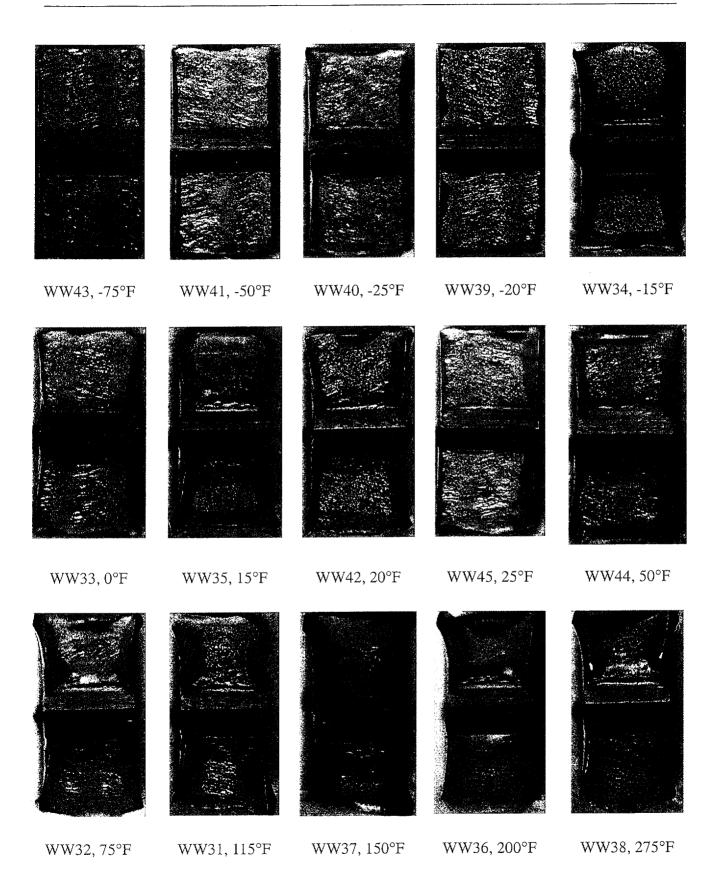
Charpy Impact Specimen Fracture Surfaces for Beaver Valley Unit 2 Reactor Vessel Weld Metal Specimen
